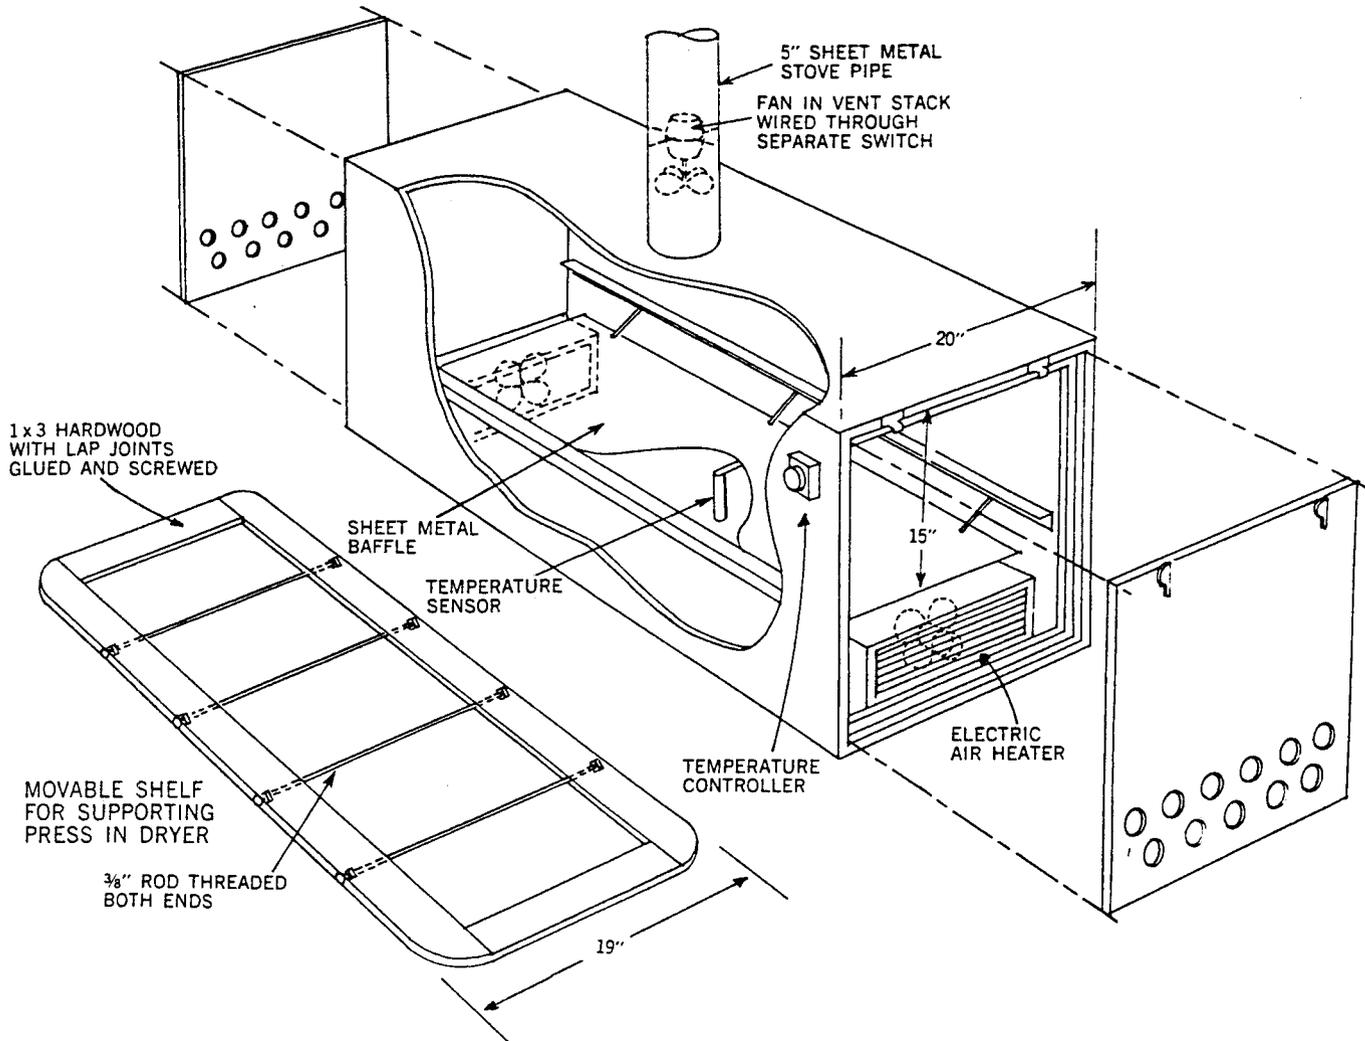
Design for a completely closed plant drier with forced draft ventilation for drying specimens preserved with alcohol or formaldehyde. The stack should be vented to the outside.
